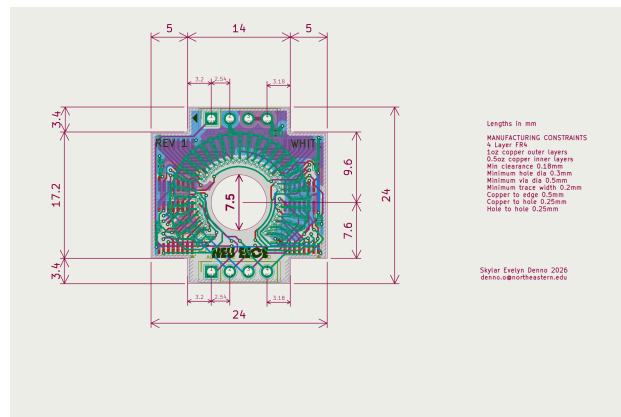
PCB layout. Inner layers are ground plane and VCC=5V plane. The width of these boards is only 24mm!
